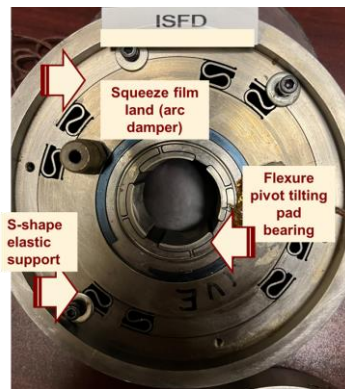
Damper bearing*: series integral SFD and flexure pivot tilting pad bearing, circa 2000.
